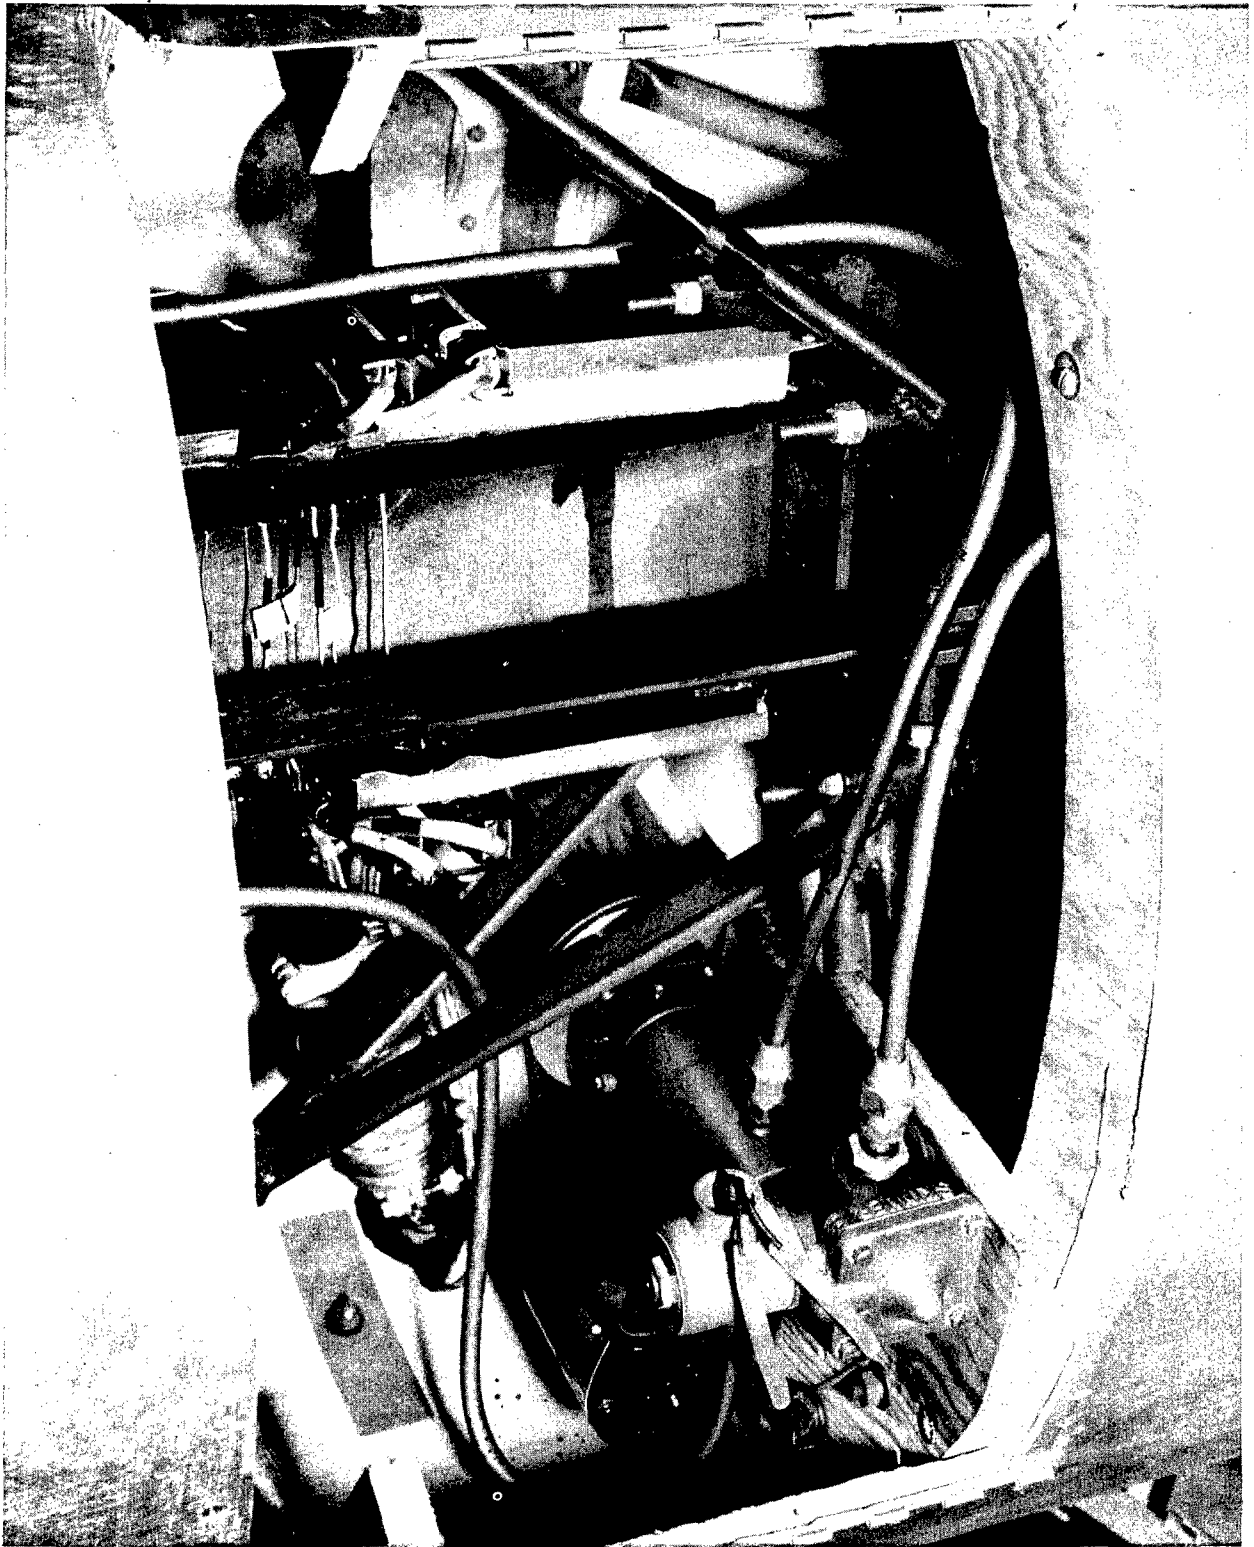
Fuselage Flexure Beam and Air Valve Installation
